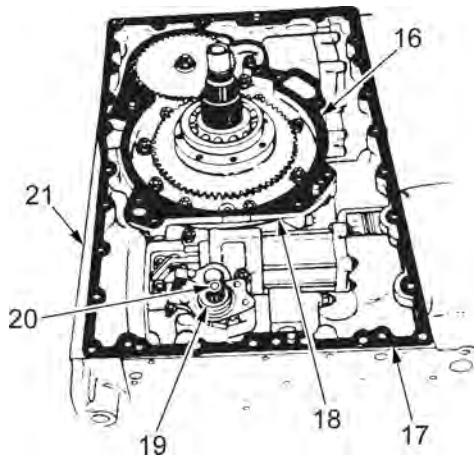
Input Housing Gasket, Bevel Gear Gasket, and Steer Shaft Seal Installation.
